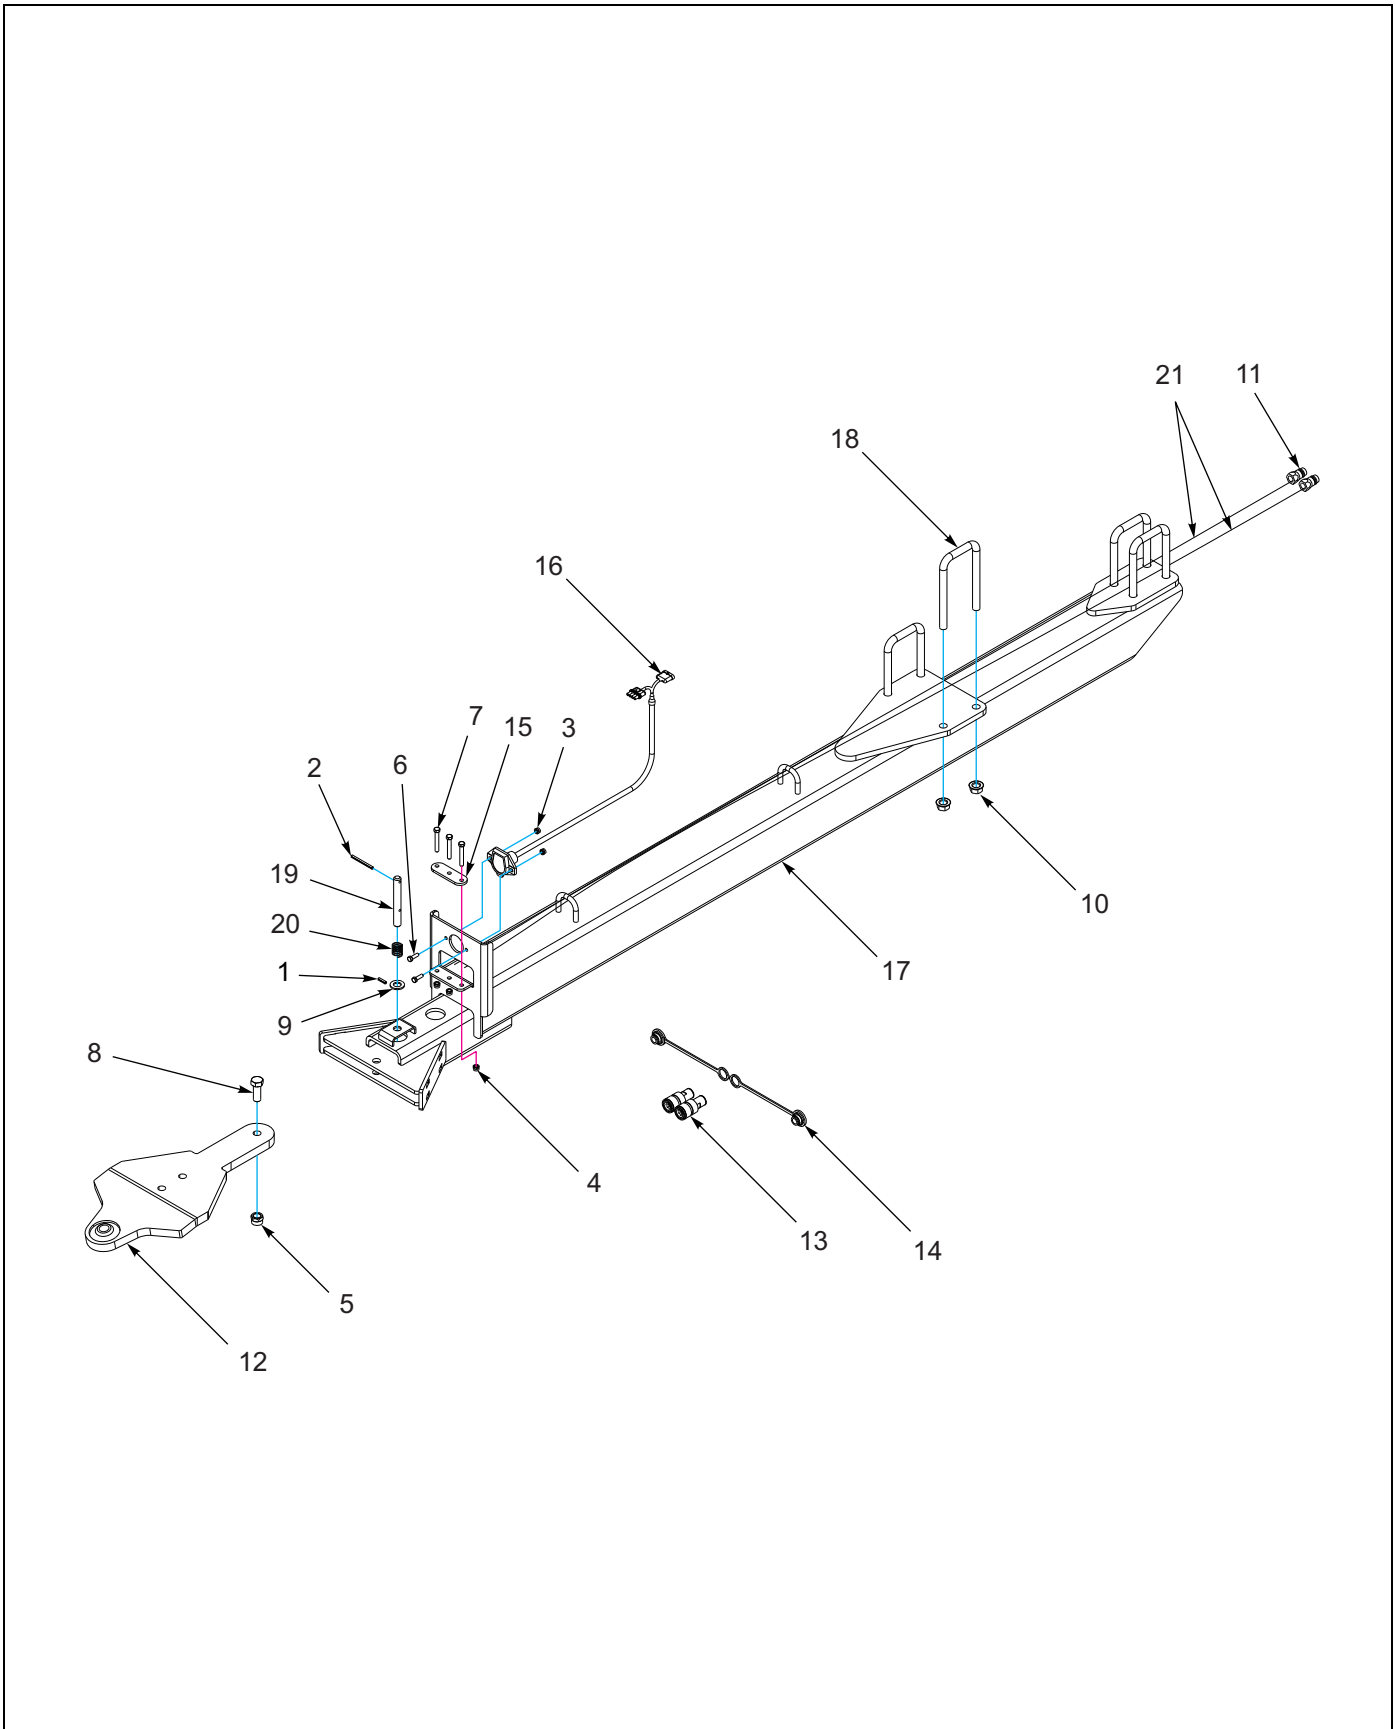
Rear Hitch Assembly - Folding 8 Shank
